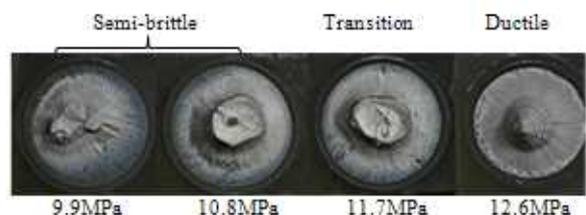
Fracture surfaces of PE-UM-1 for variable load ranges
